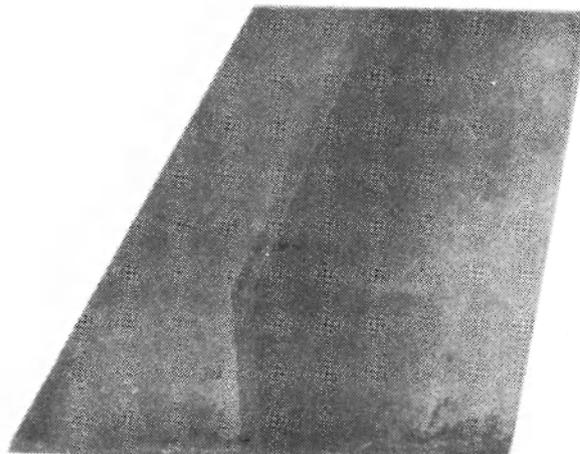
Laser Pressure welding of austenitic stainless steel of T-Profile
